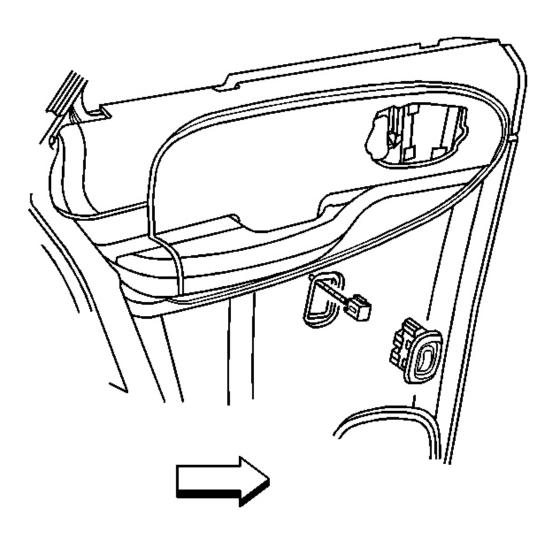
View Of Window Switch Bezel From Door Trim Panel Courtesy of GENERAL MOTORS CORP.
